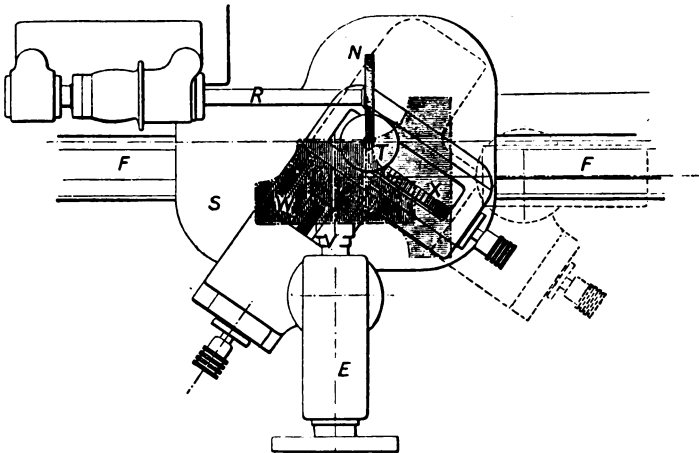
Special Grinding Fixture. Wm. Muir & Co. Ltd.
